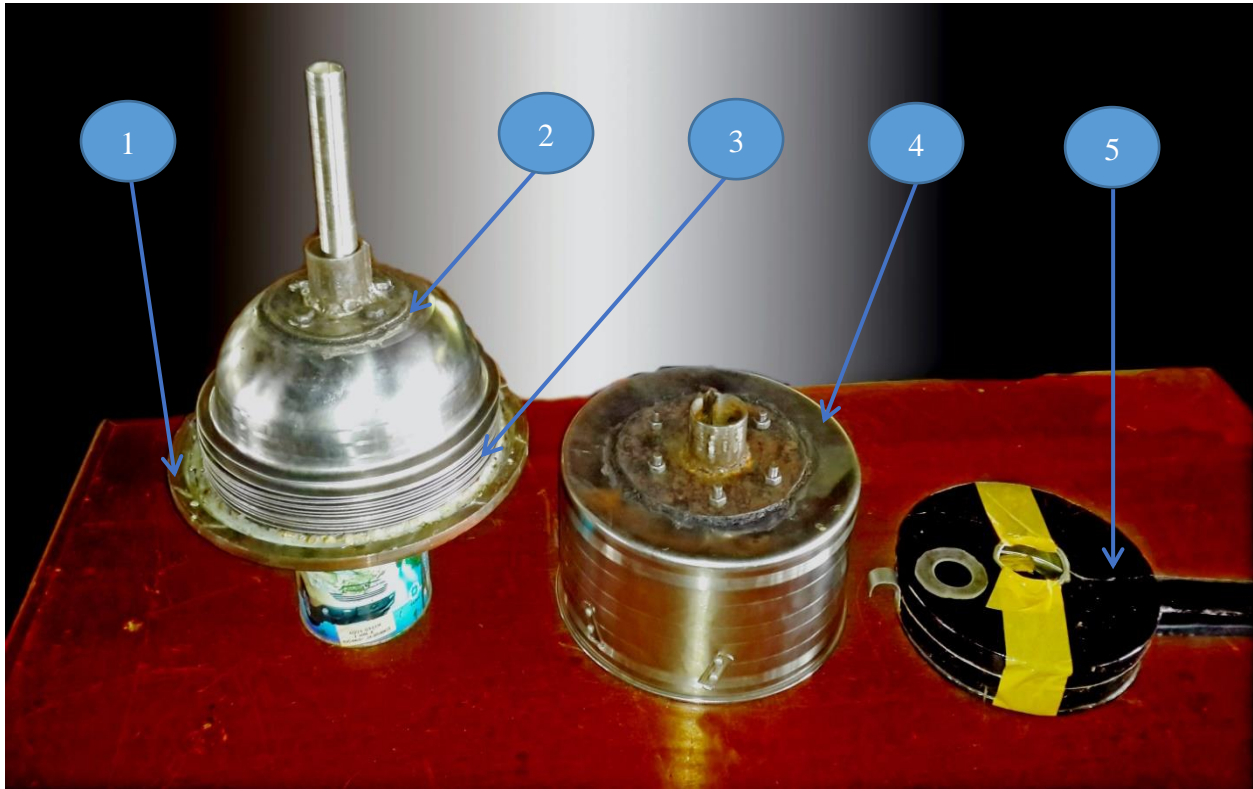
Shows the fabricated plate holder (1), separating plate (2), 12 drum plates (3), cover (4) and latex collector (5)
